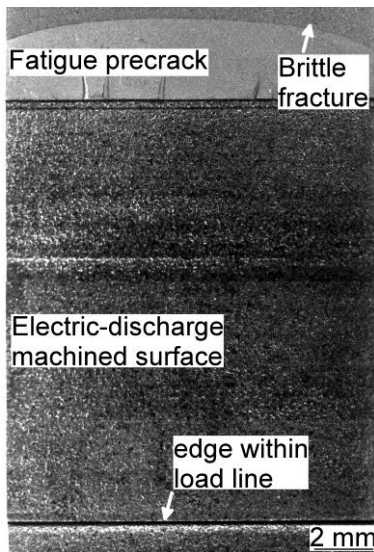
Typical broken specimen (here: AT) with machined notch, fatigue precrack and brittle fracture. The edge within the load line was used to measure  $a_0$ .
